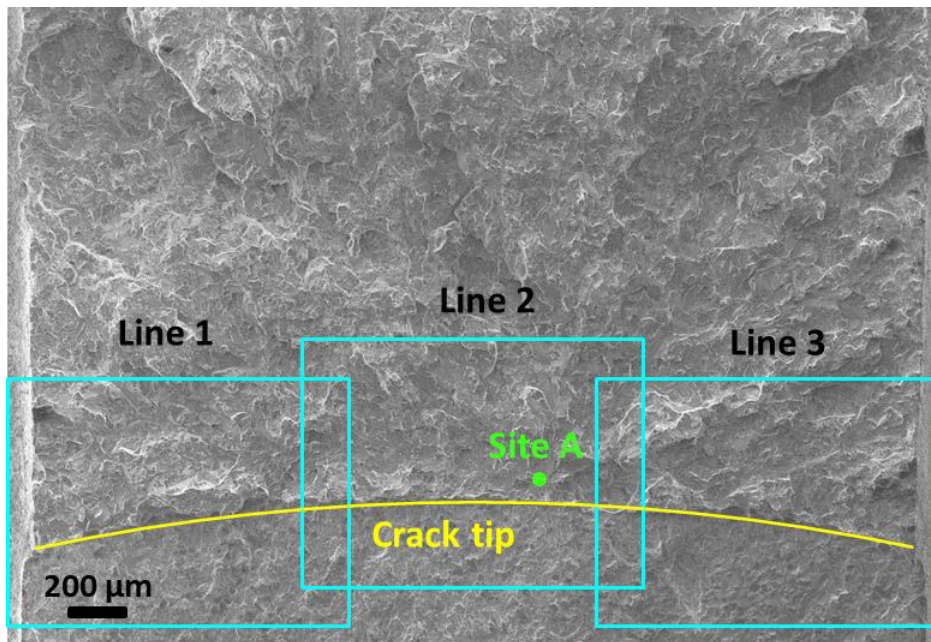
Fracture surface secondary electron image of a broken sample. The crack tip is formed by fatigue pre-cracking. Line images 1-3 are taken at medium resolution in order to locate the primary fracture initiation site. Site A signifies the location of the primary fracture.
